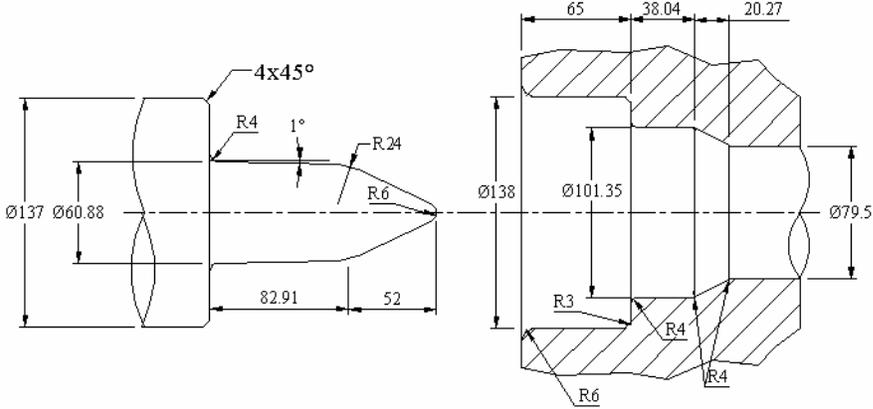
Header tool and gripper die of 3rd stage [3]
